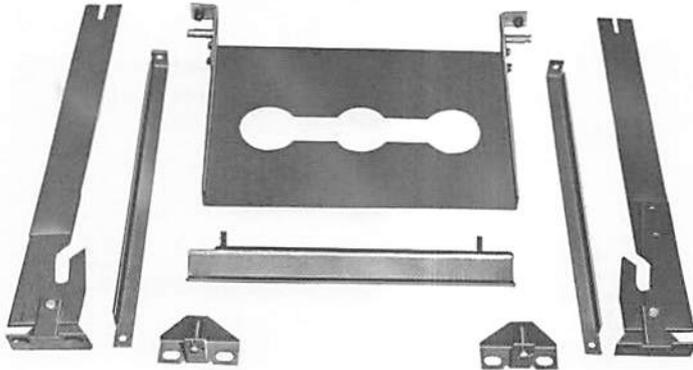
Shutter mechanism M-26 (Ref. 37)
